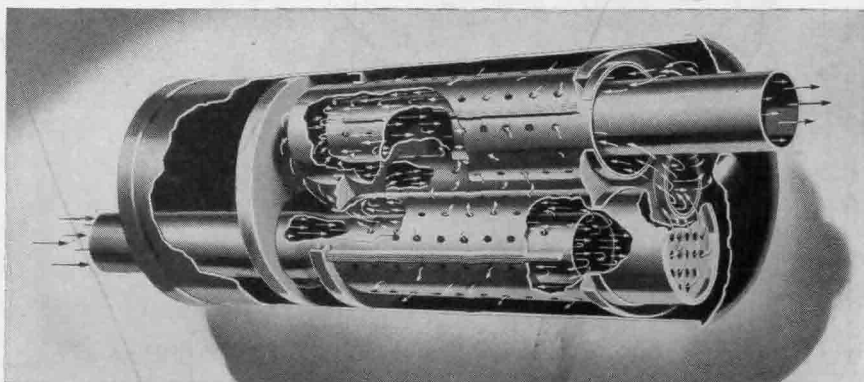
Exhaust muffler in sectional view. The arrows show the path of exhaust-gas flow through the muffler. (*Chevrolet Motor Division of General Motors Corporation*)
